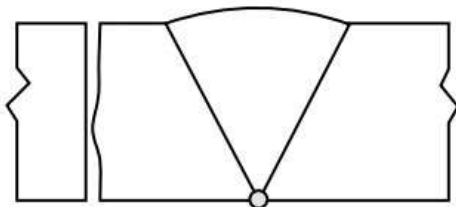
Failure of reinforced butt weld
